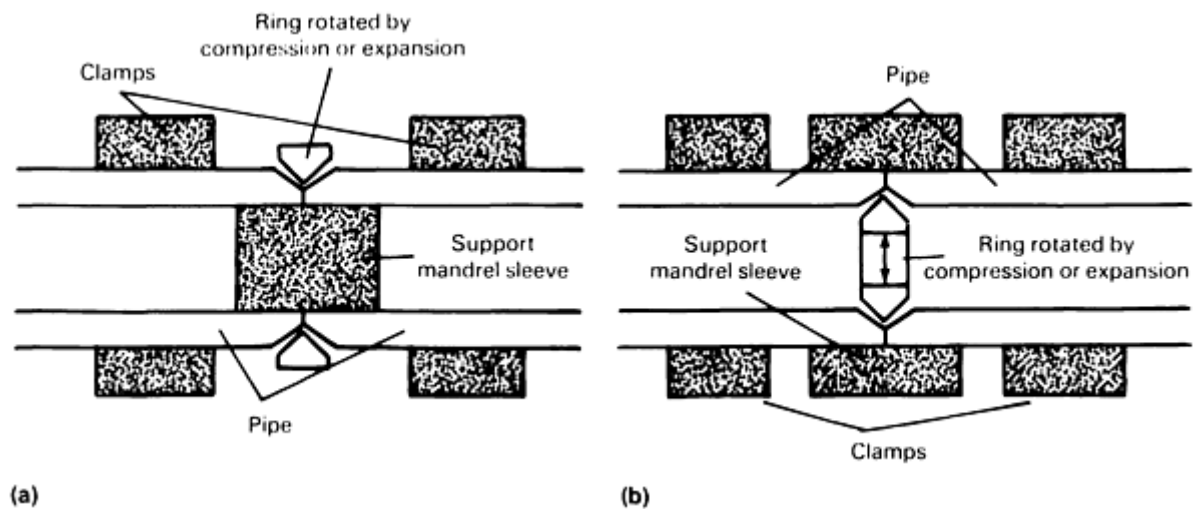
RADIAL FRICTION WELDING. (A) USING COMPRESSION. (B) USING EXPANSION
